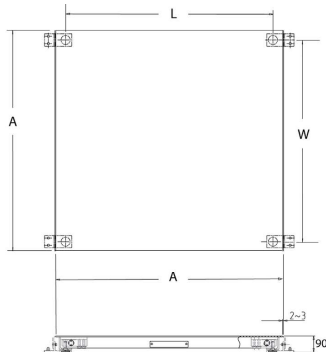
Floor Scale Dimensions, (Shown with optional Foot Plates)
